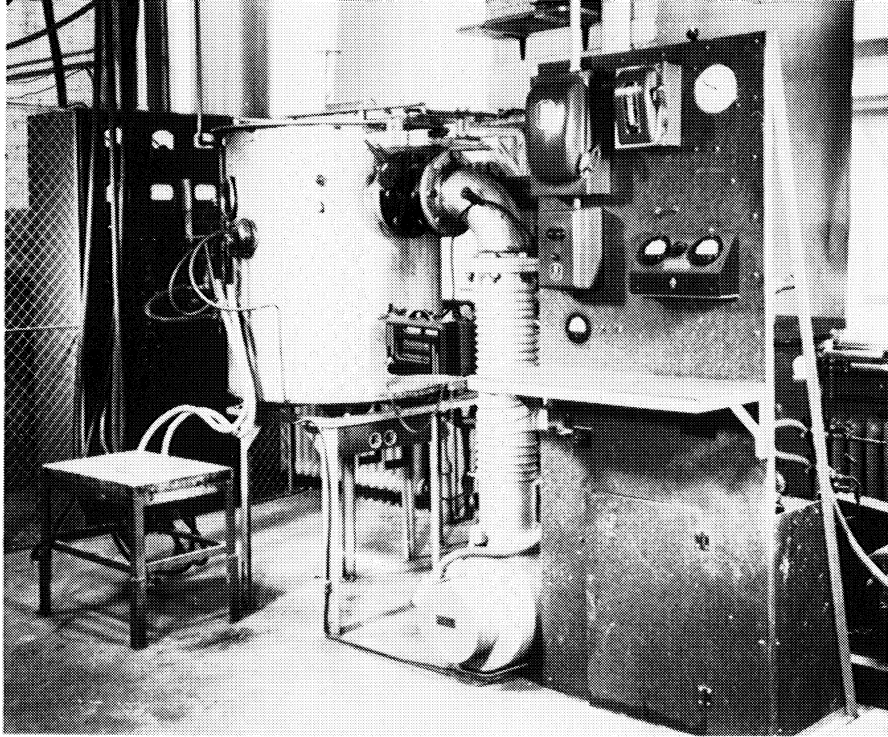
Photograph of Vacuum Induction Melting Equipment Showing Control Panels, Melting Shell, and Vacuum Pumps.
